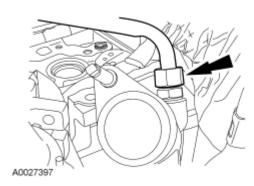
EGR Tube Nut At EGR Courtesy of FORD MOTOR CO.
